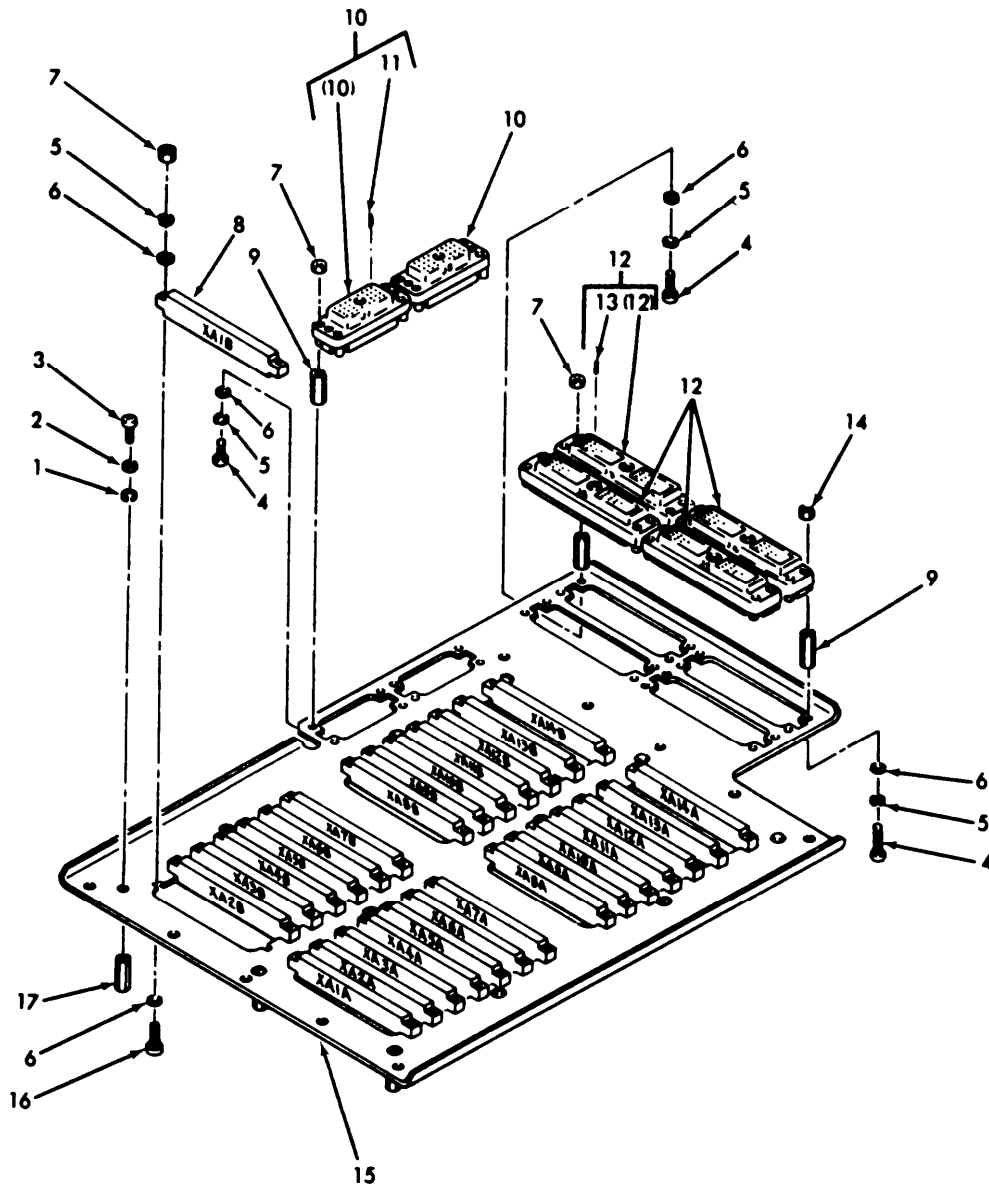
TERMINAL BOARD ASSEMBLY COMPONENT PARTS
